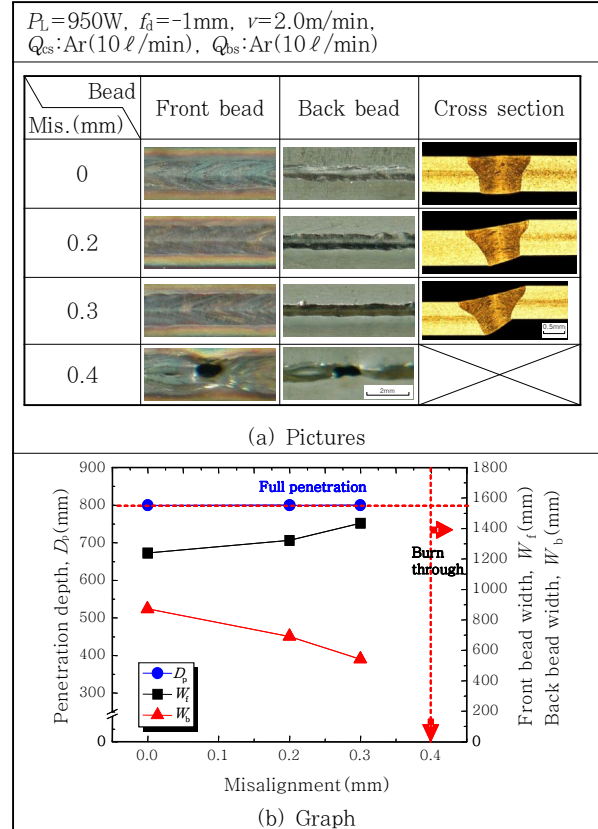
Welding properties with misalignment for butt welding(STS304)
